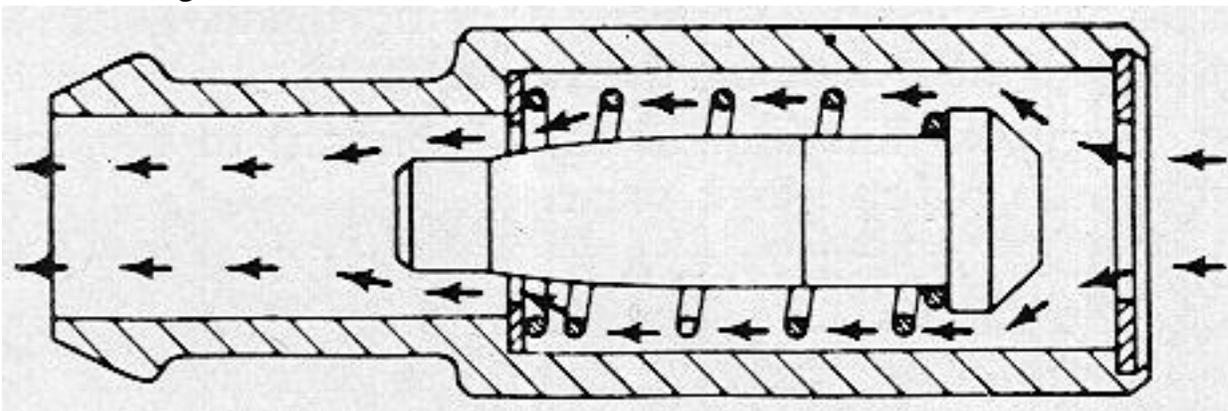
POSITIVE CRANKCASE VENTILATING VALVE
